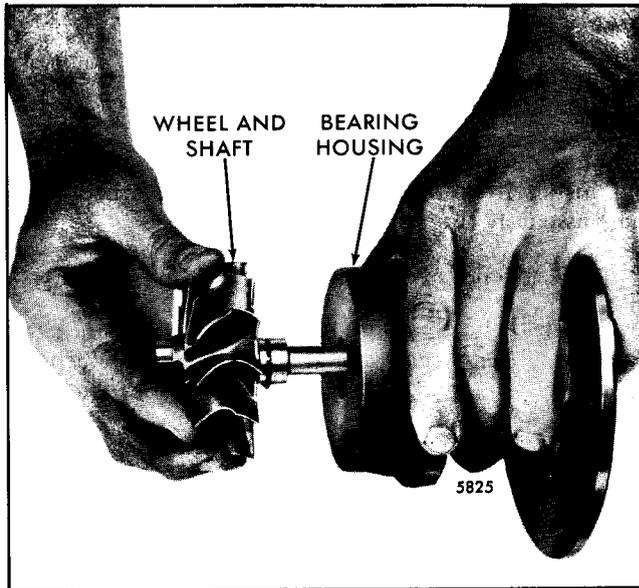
Installing Shaft and Wheel Assembly Through Back Plate into Bearing Housing
